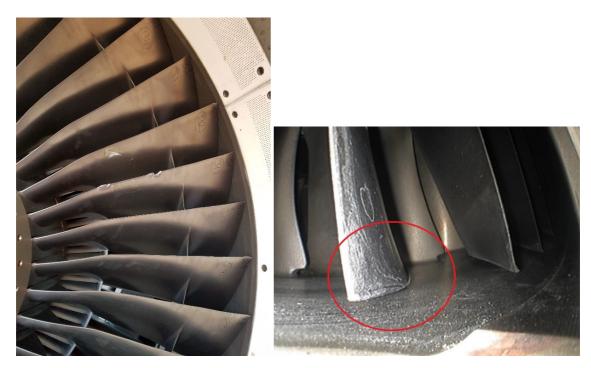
FOD on fan blades; tip rub at compressor stage 3
